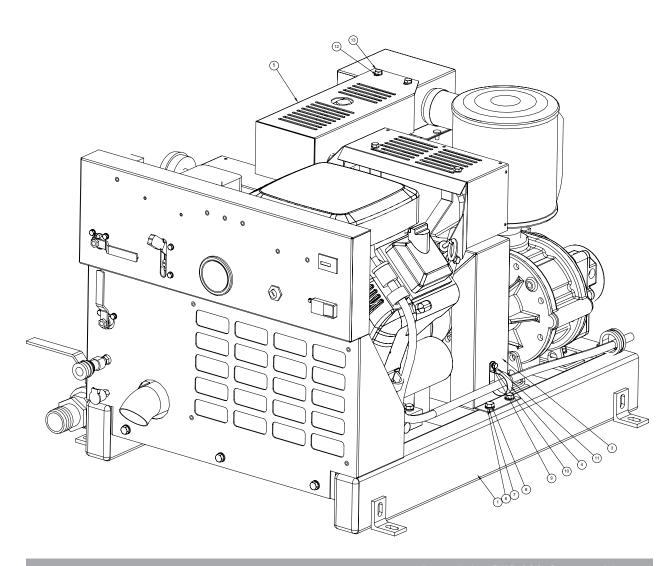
Machine Assembly - Front Left View D-6150 Rev -
